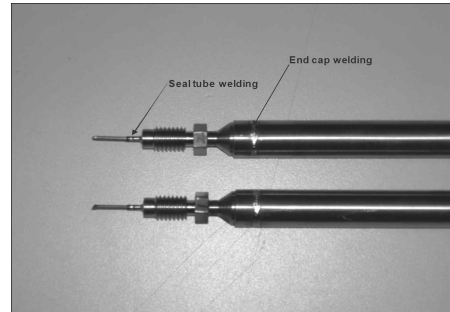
Welding samples using end cap and seal tube parts
